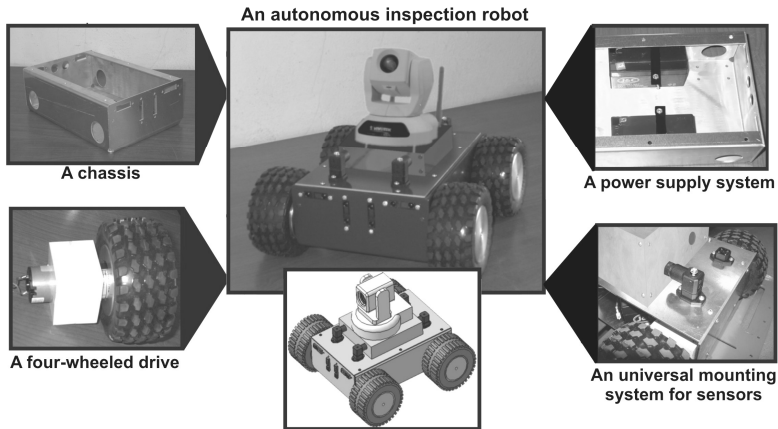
Mechanical parts of the prototype of the autonomous inspection robot [4]
